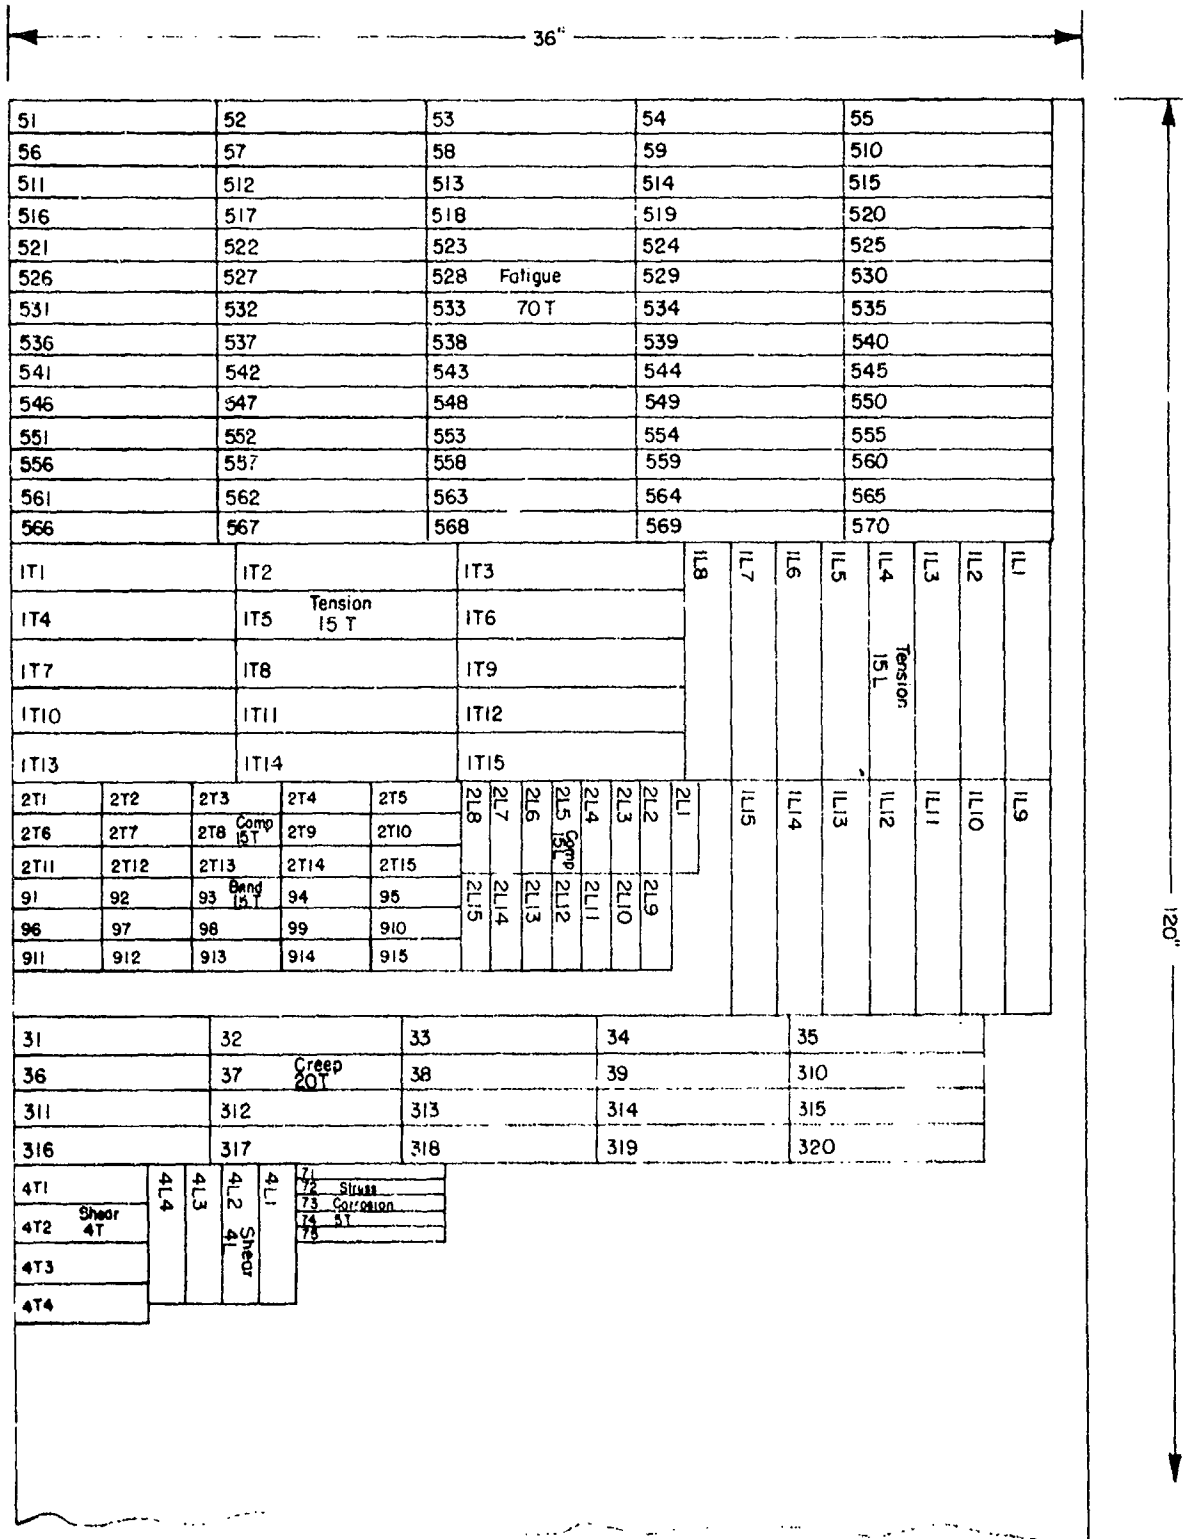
SPECIMEN LAYOUT FOR INCONEL 625 SHEET
